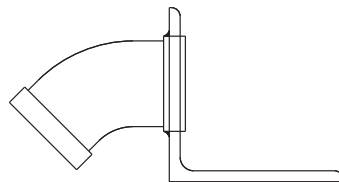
45° Bracket and Elbow, P/N 263362
